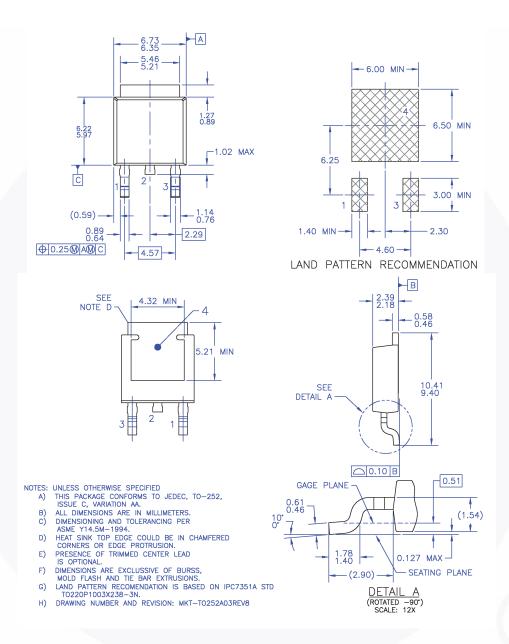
TO252 (D-PAK), Molded, 3 Lead, Option AA&AB
